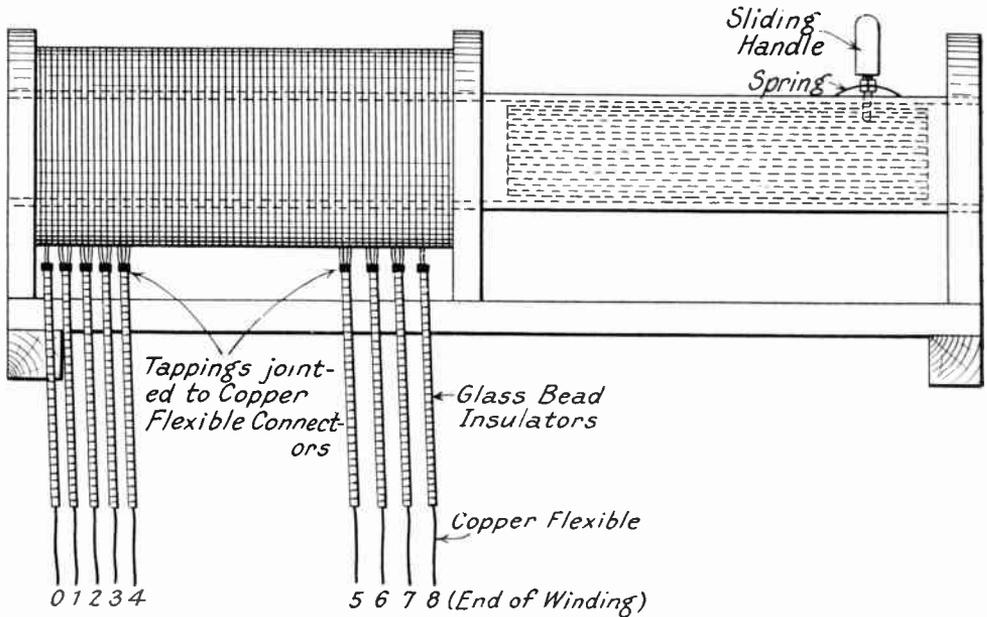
THE COMPLETED COIL AND MOVABLE IRON CORE FITTED TO THE BASEBOARD.
